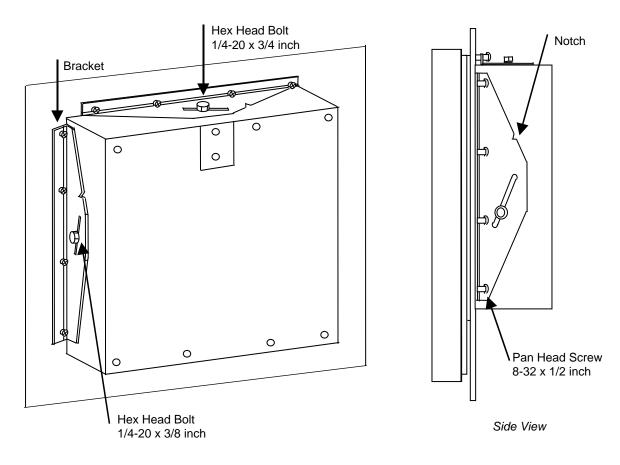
Mounting Flush in a New Panel Cutout (Rear View)
